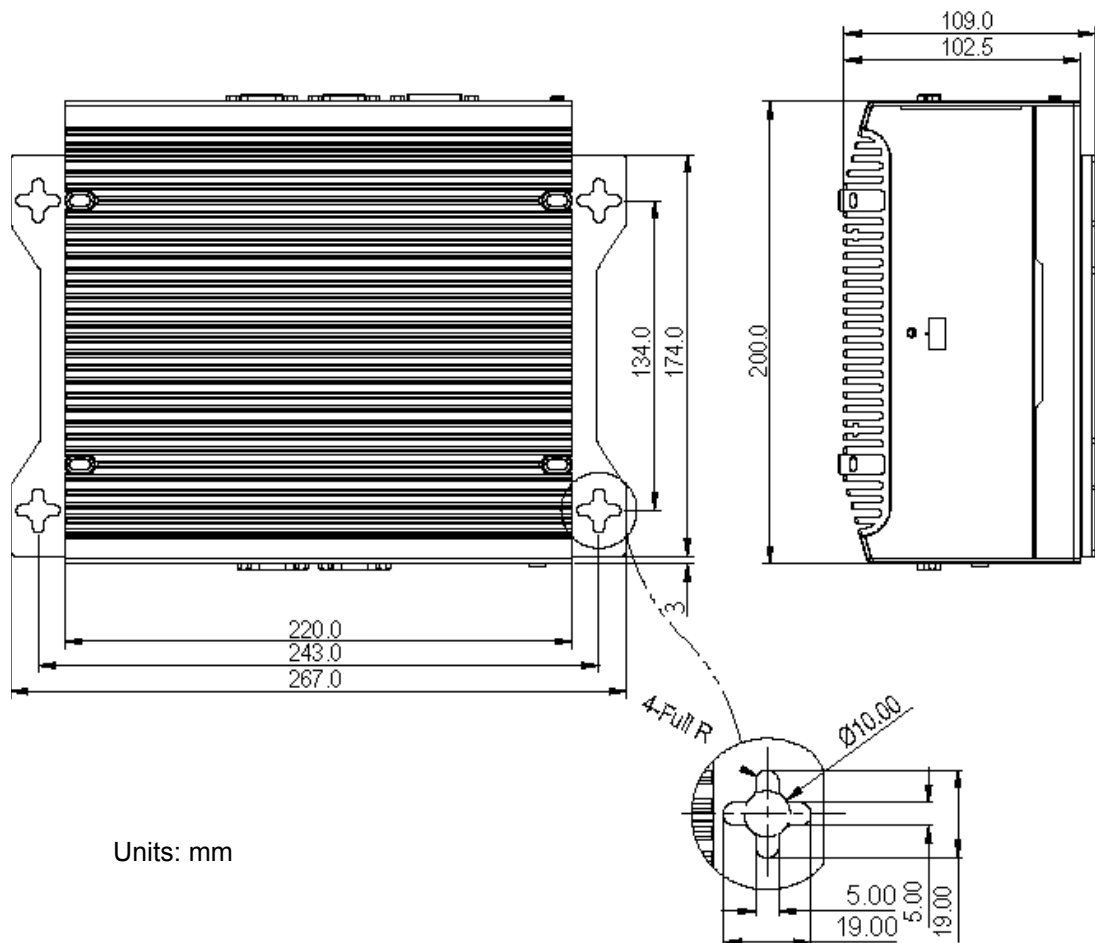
ARK-3440 Mechanical Dimensions Drawing
